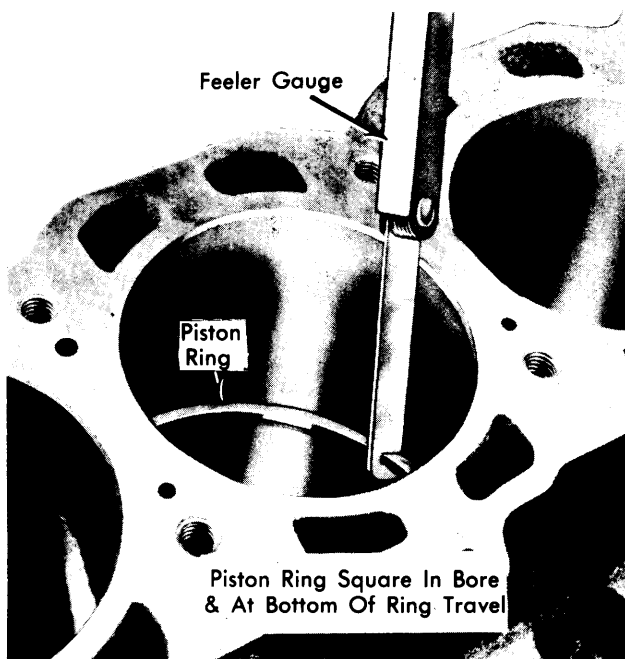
Using Feeler Gauge to Check Ring End Gap
